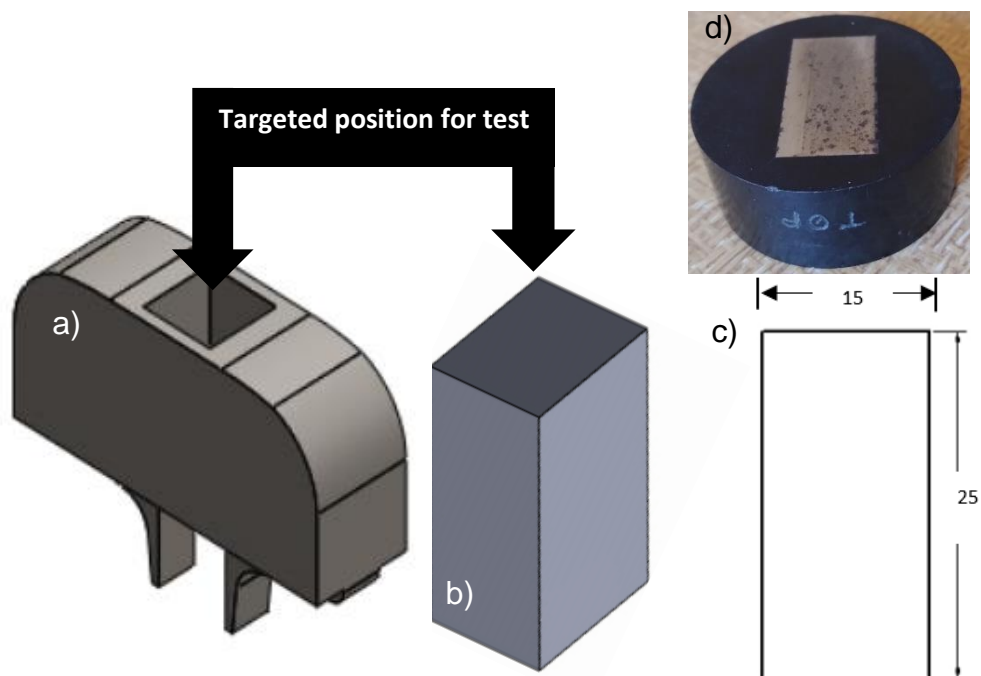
Test specimens a) targeted position on rail line head for fatigue test; b) cut-out of specimen; c) specimen dimensions; d) mounted specimen dimensions
